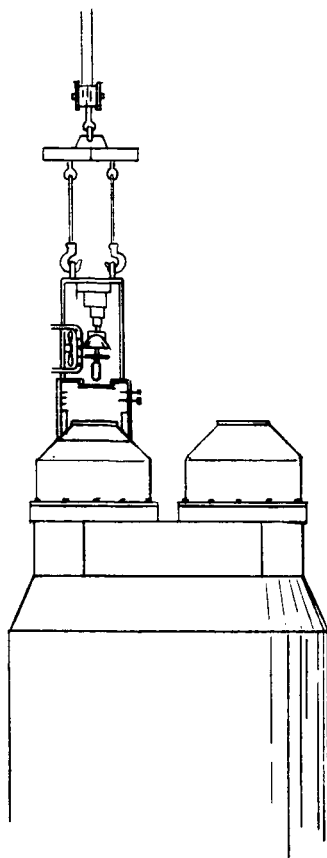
Mating of RTG Fuel Loading Mechanism
